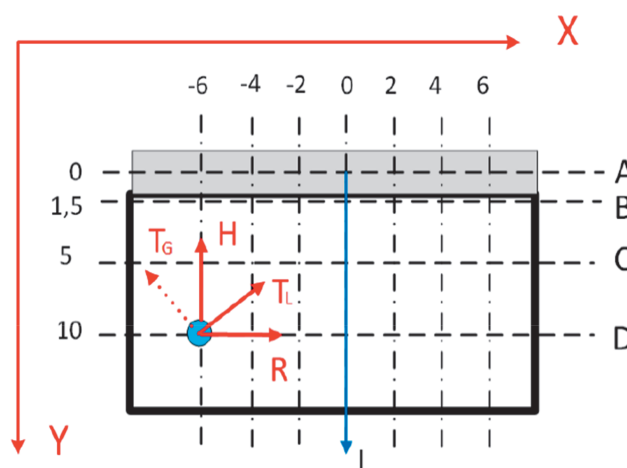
Arrangement of measurement points (cm) and directions of tests in relation to the welded joint
